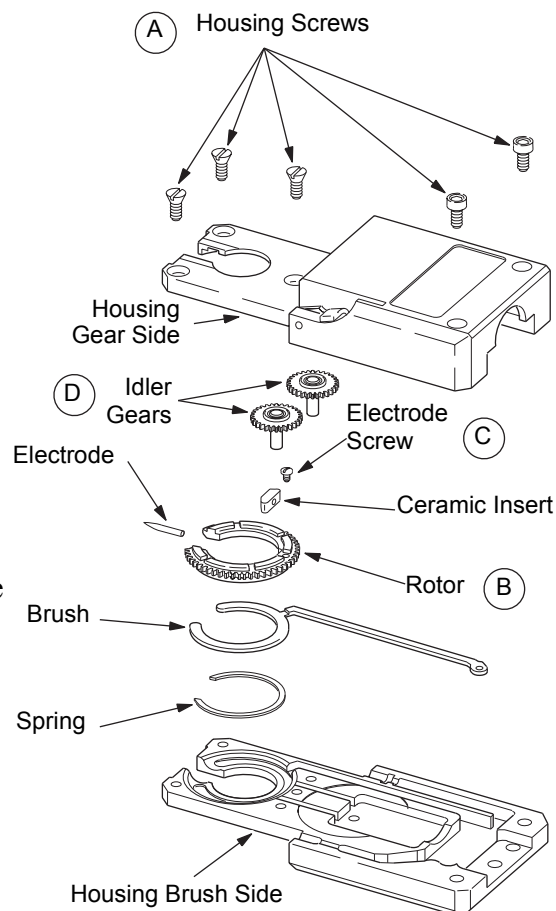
Removing Series 4 Micro Weld Head Components for Cleaning
